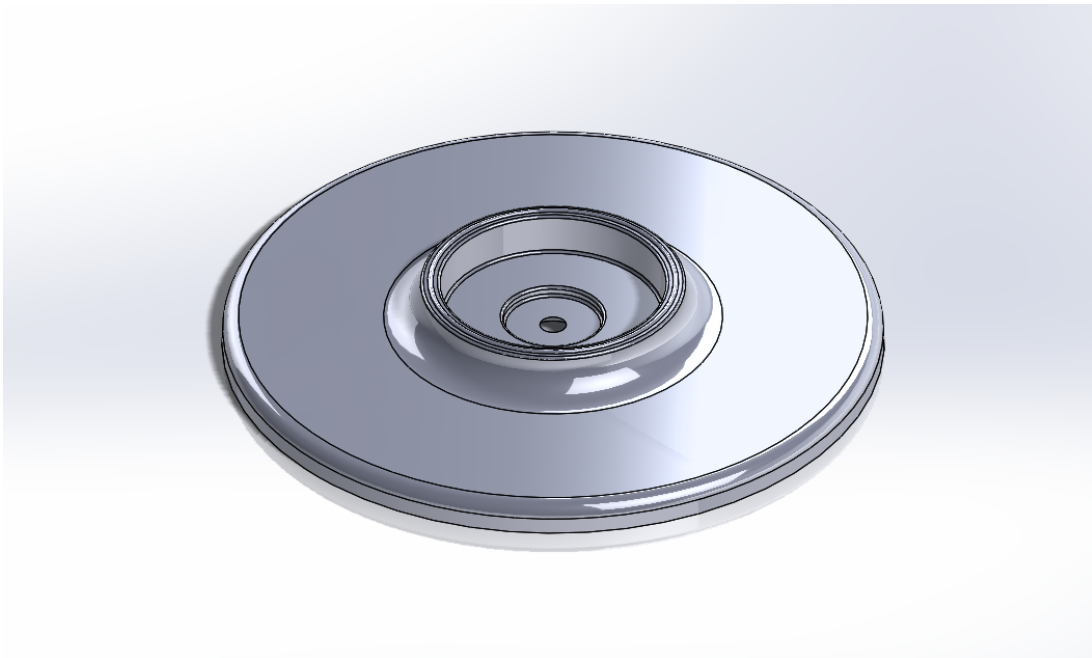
CAD drawing of the Floor/Ceiling Plate on SolidWorks
